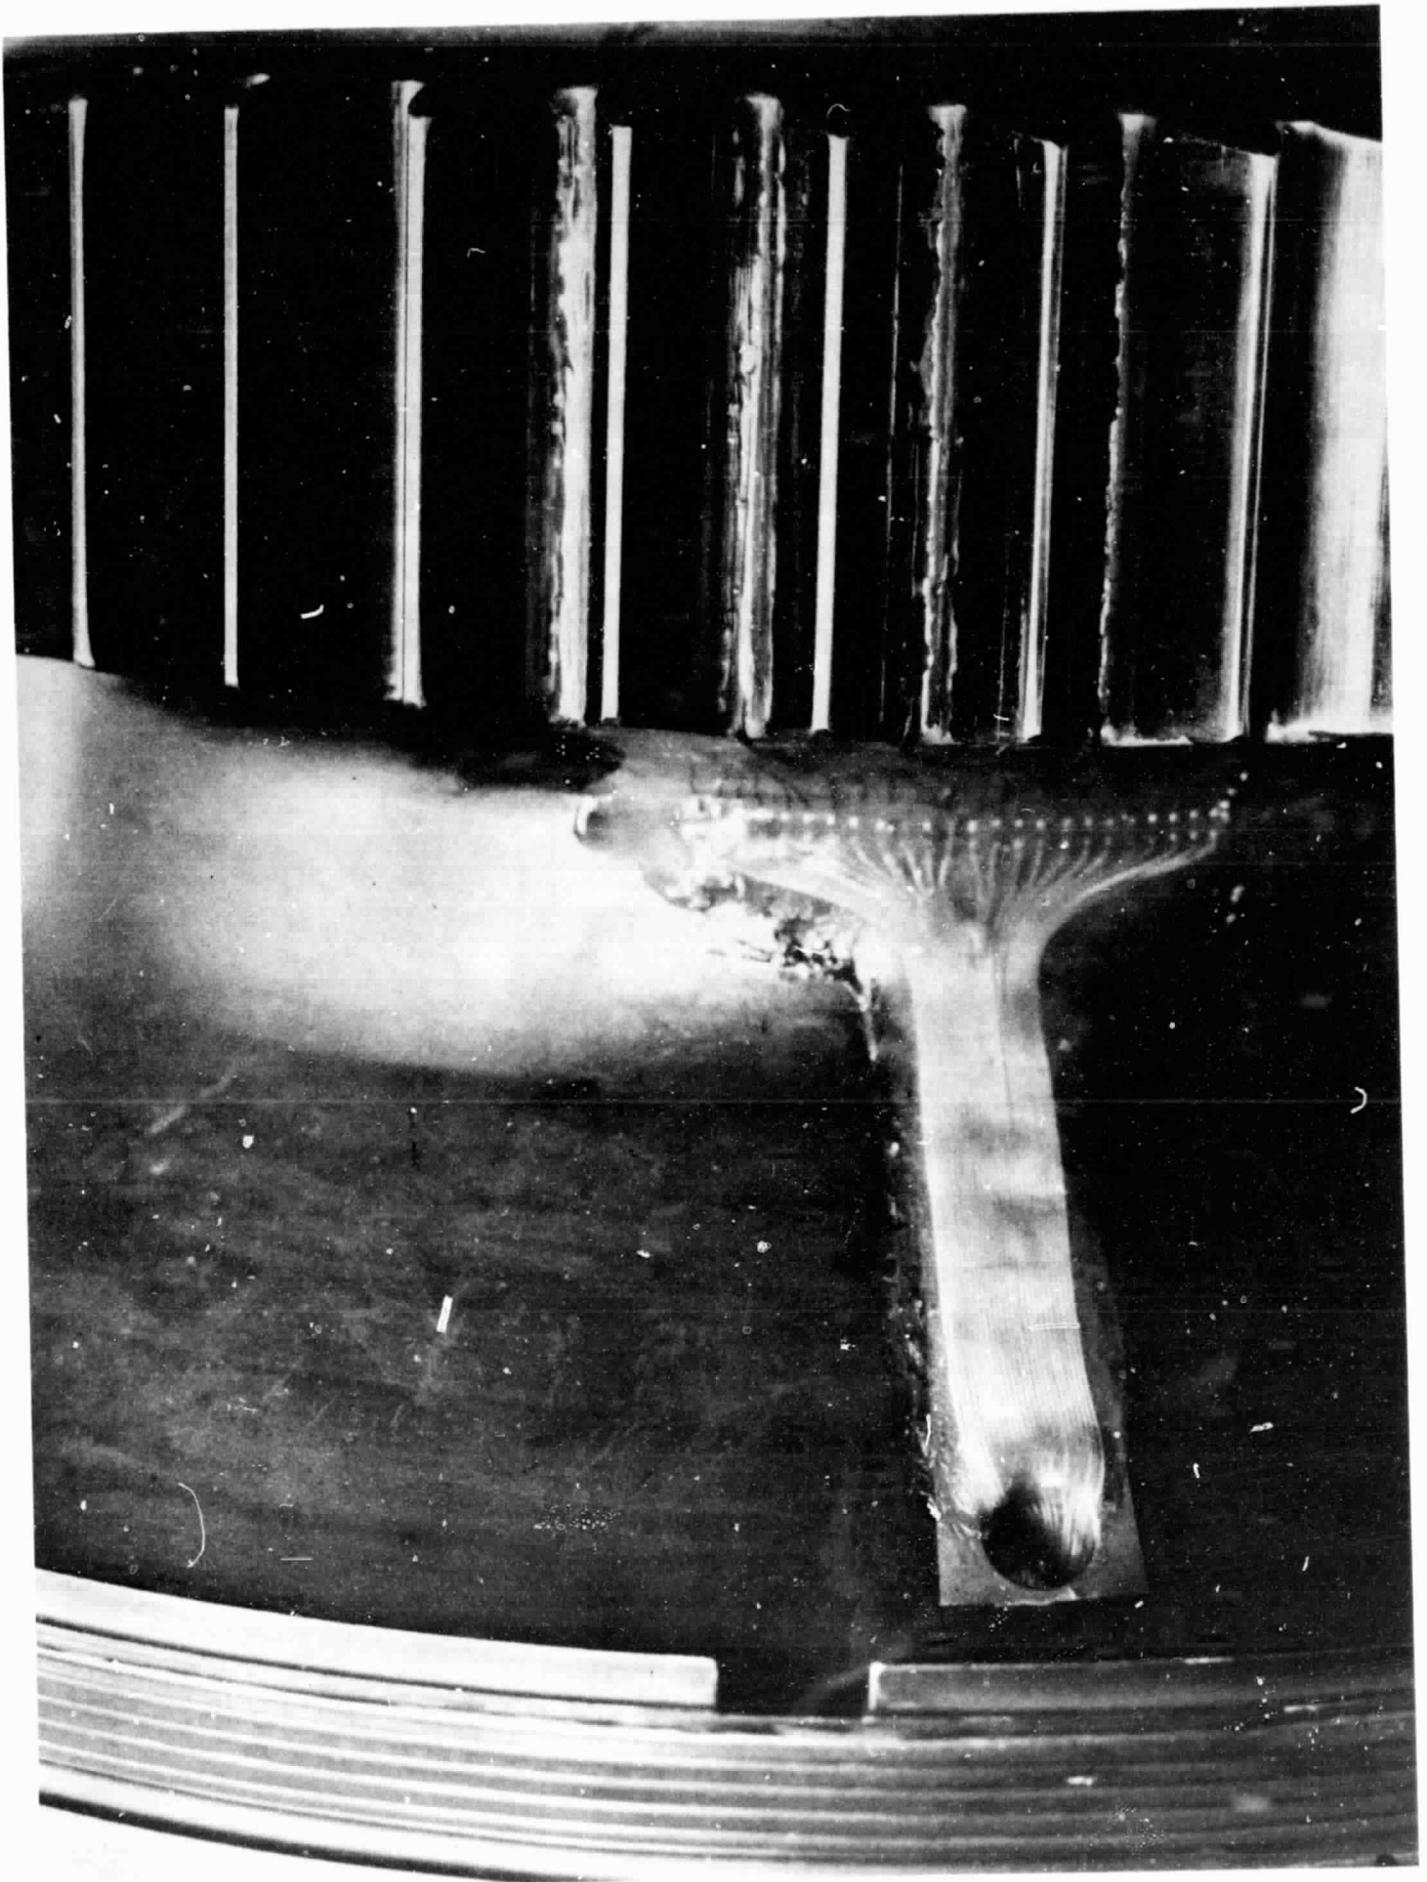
BEVEL GEAR GAGES IN SUN GEAR TOOTH: ROOTS
